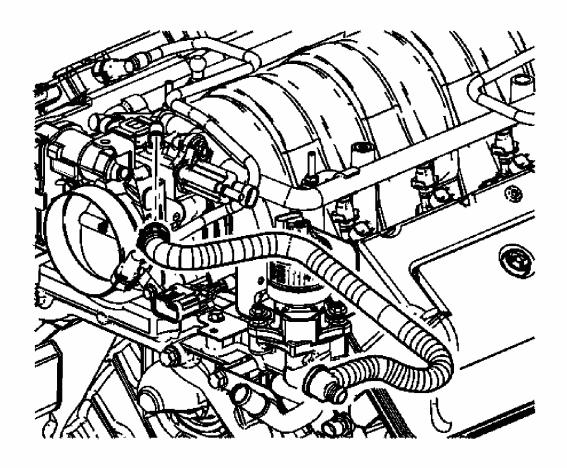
Identifying Brake Booster Hose Courtesy of GENERAL MOTORS CORP.
